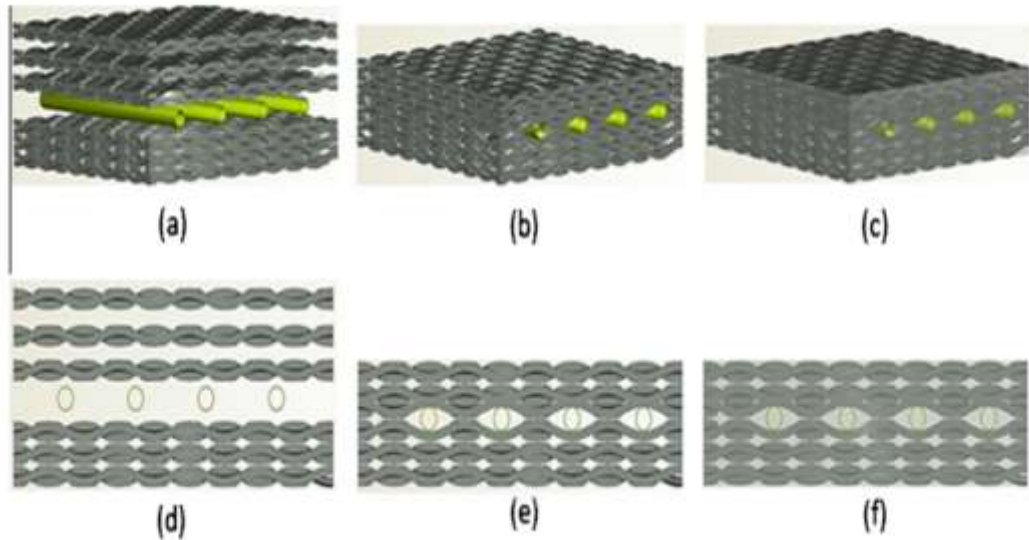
Schematic diagram for manufacturing techniques based on non-removable hollow cores (a and d) placement of hollow cores (glass, polymer or metallic) between dry fabric layers, (b and e) composite processing (hand lay-up, vacuum bagging, resin infusion, RTM or autoclave) and (c and f) cured composite laminate with embedded microchannel (Saeed, Chen, & Li, 2015)
